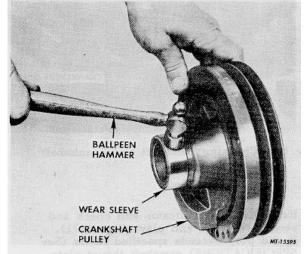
Expanding Crankshaft Pulley Wear Sleeve for Removal
